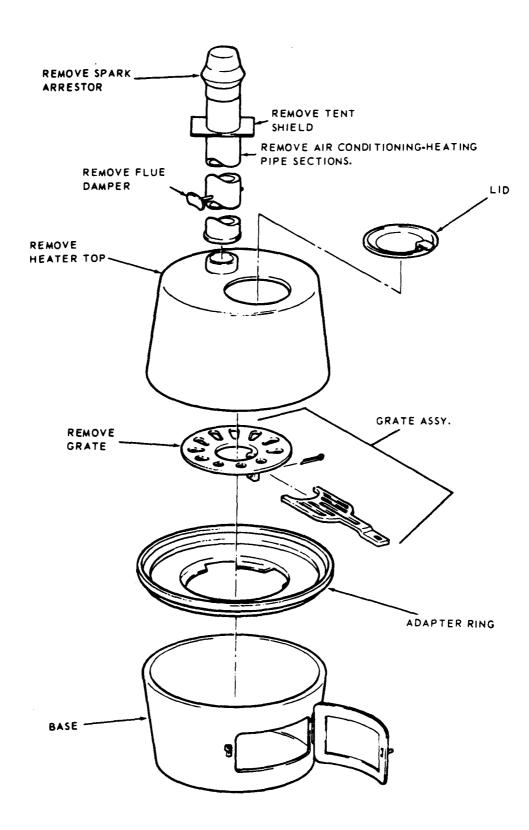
Space heater component removal and installation (Type I without Conversion Kit installed) (sheet 1 of 2).
